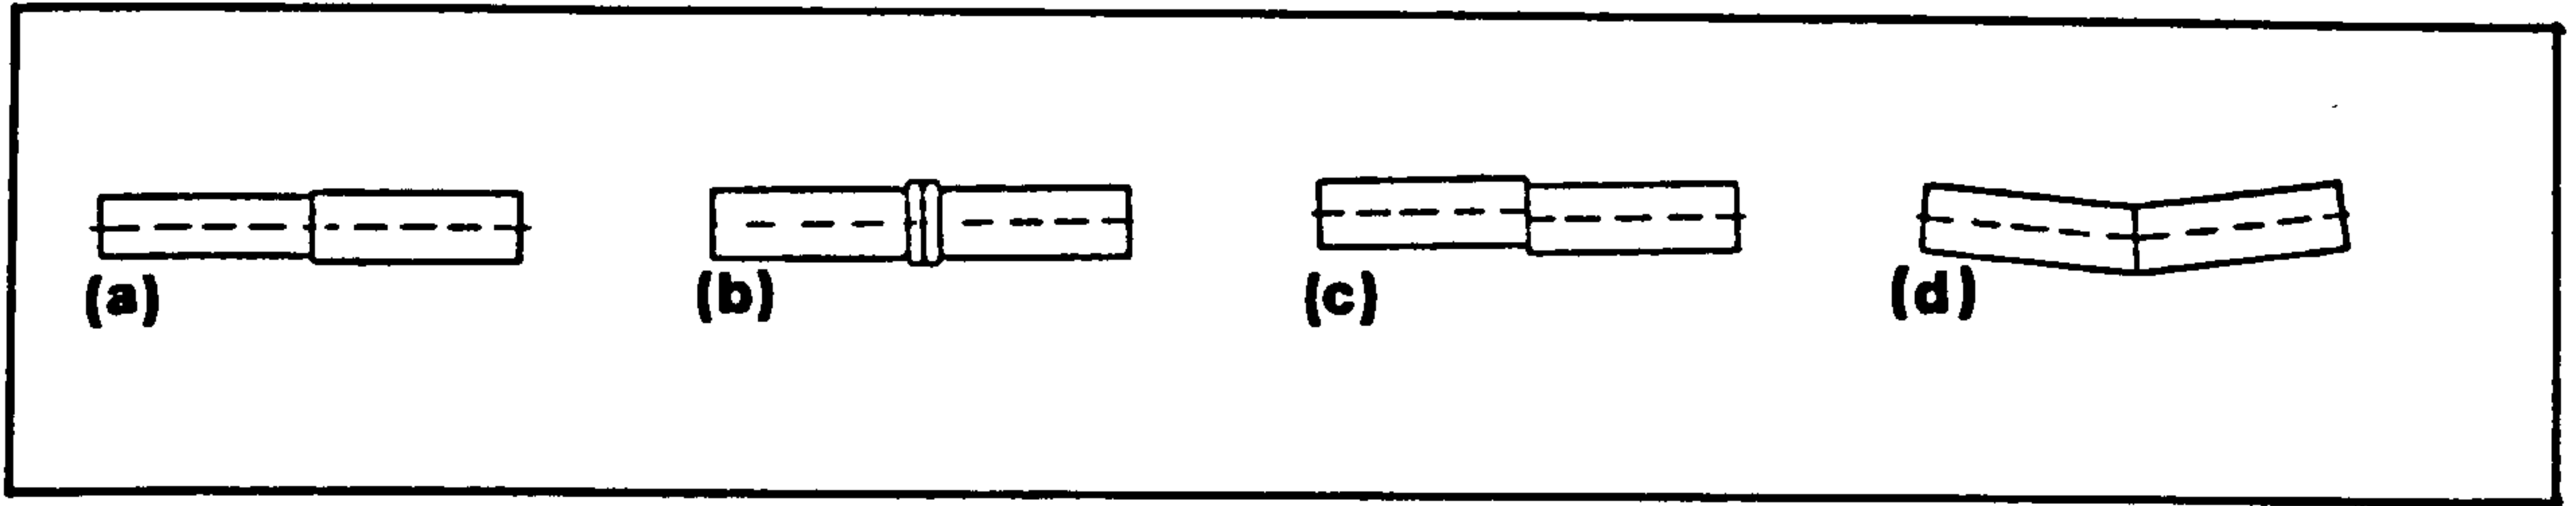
Geometrical defects in plastic pipes butt welded ;
